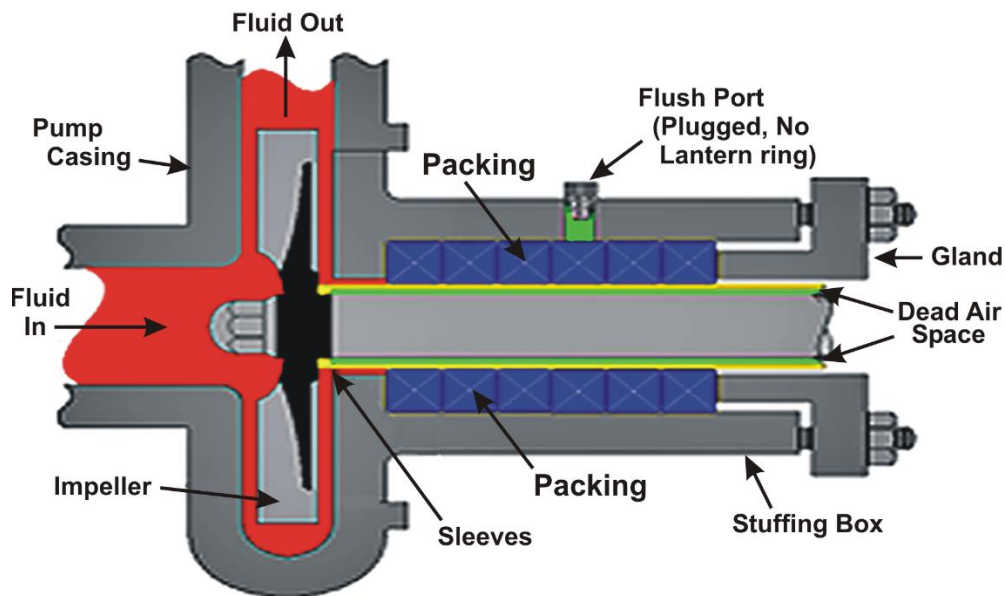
Pump components and packing location (modified from the original drawing [courtesy of Slade, Inc.]
